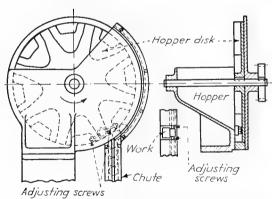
Vertical rotating disk hopper for feeding shouldered pieces to the chute. By adjusting the hardened dog-point screws, it is possible to feed pieces with a difference of only 0.010 in. on the diameter.
